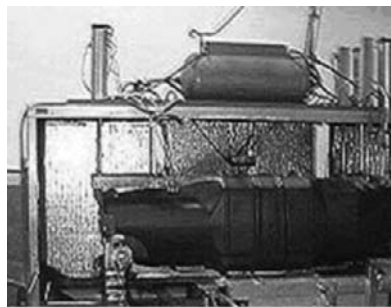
Container moulded Siamese or two-up, on a specially designed machine for automatic separation and trimming
